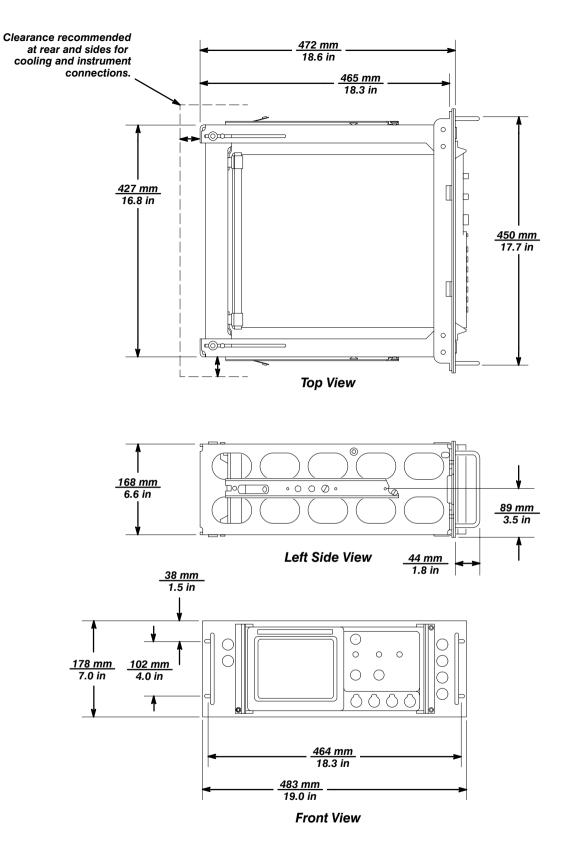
Dimensional Drawing of a Rack Adapted Instrument
